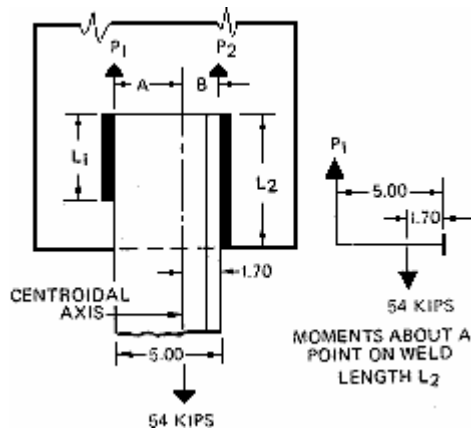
Fillet weld on both sides of angle iron.
